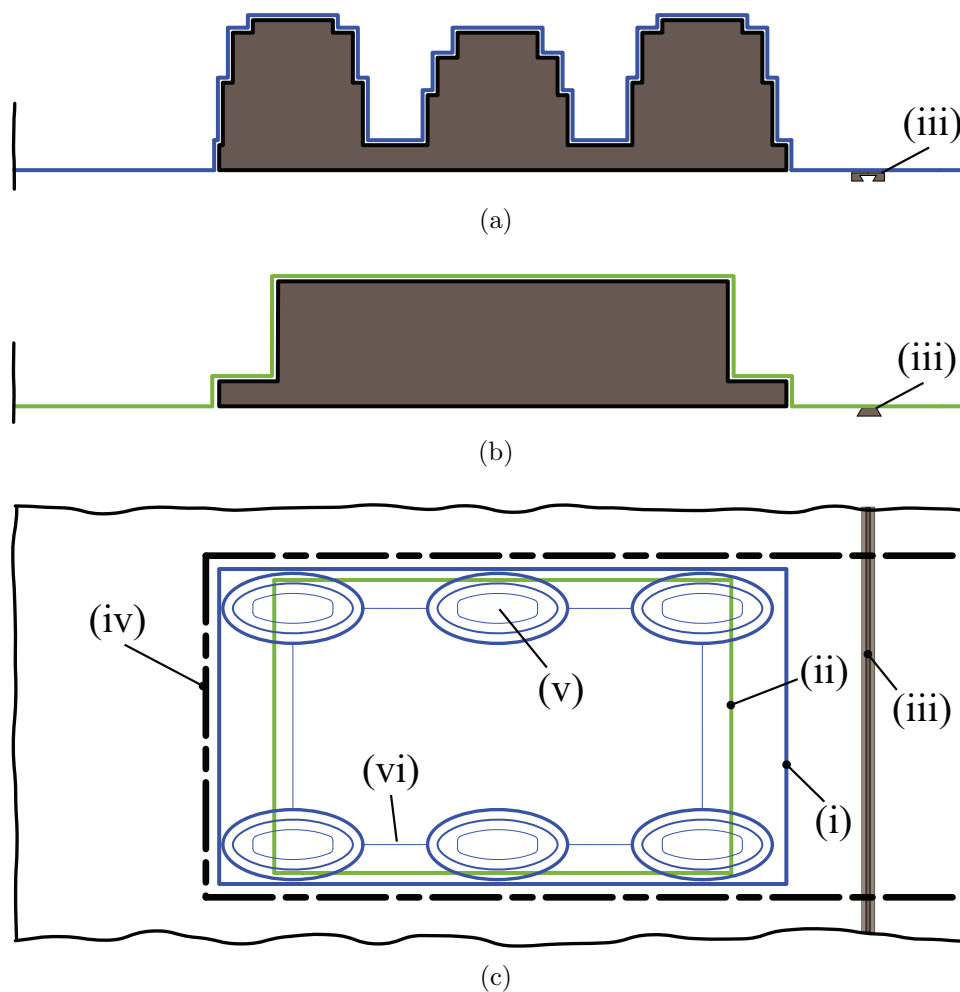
Sealed flexible shell manufacturing process. (a) Side view: forming of the bottom bag layer with protrusions for freedom of leg motion. (b) Side view: forming of the top bag layer. (c) Underside view: bag layer assembly with details (i) bottom piece of the bag, (ii) top piece of the bag, (iii) joining “ziploc” zipper on the bag, (iv) heat welds at the edge of the two layers, (v) formed out-of-plane pockets, shown topologically in this view, and (vi) extra vertical webs that unavoidably form in the contoured bag layer between peaks, due to the high aspect ratio of the mold.
